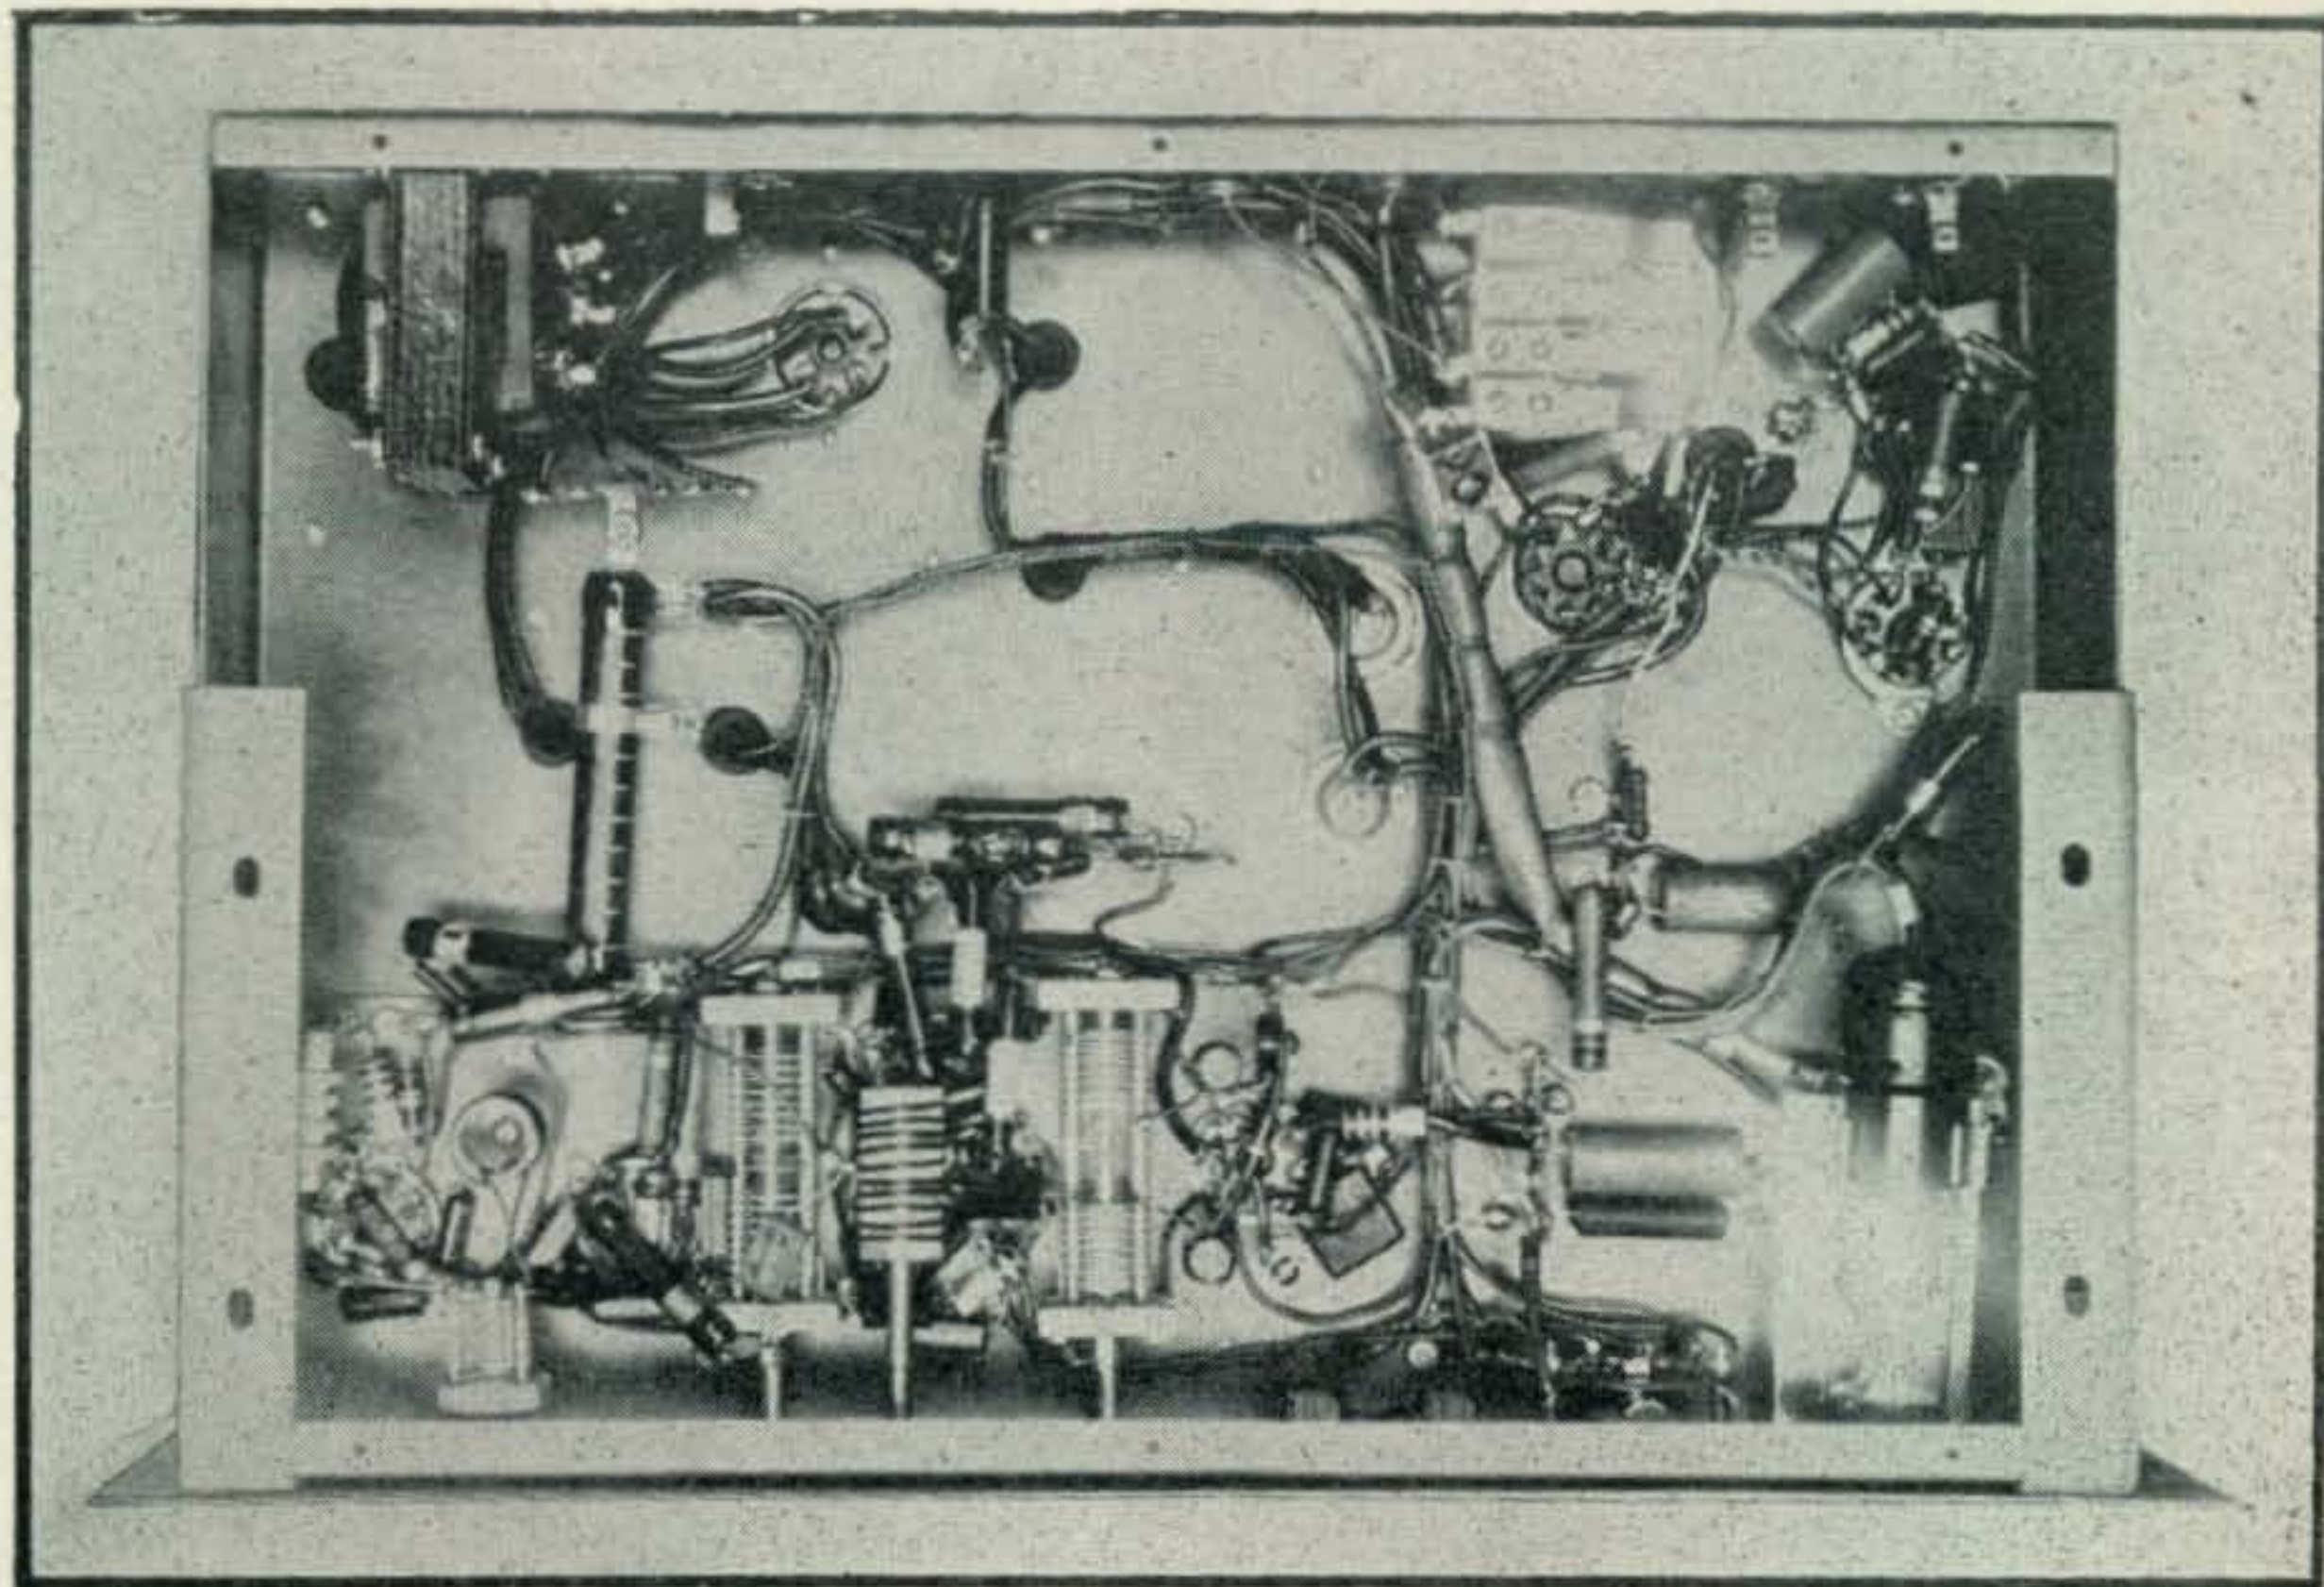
Under-chassis view of the VHF rig shows construction and wiring detail
